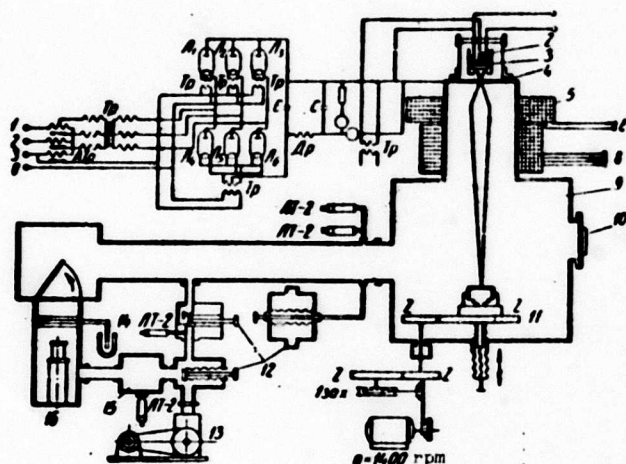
Circuit of unit for precision electron-beam welding: 1 - to block for feeding of modulator; 2 - modulator; 3 - cathode; 4 - anode; 5 - focusing coil; 6 - to block for feeding of focusing coil; 7 - deflecting system; 8 - to block for feeding of deflecting system; 9 - vacuum chamber; 10 - loading window; 11 - spindle; 12 - vacuum cocks; 13 - fore pump VN-2; 14 - trap; 15 - fore pump; 16 - vacuum unit VA-05-1.
